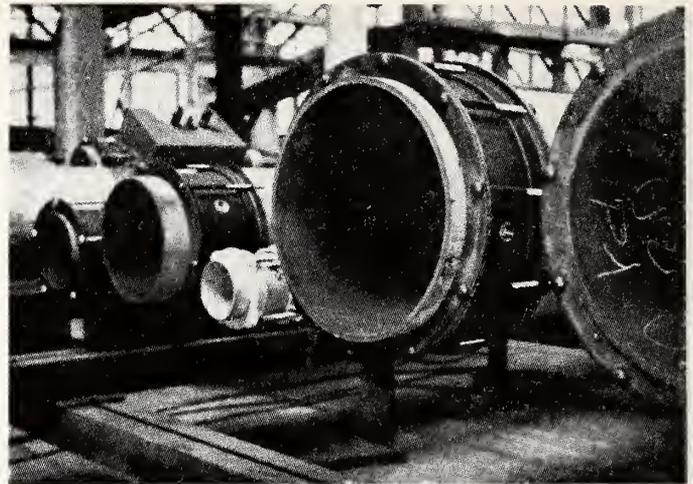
A jig should be employed to ensure correct flange alignment for certain geographical units. This eliminates adjustments on-board.
